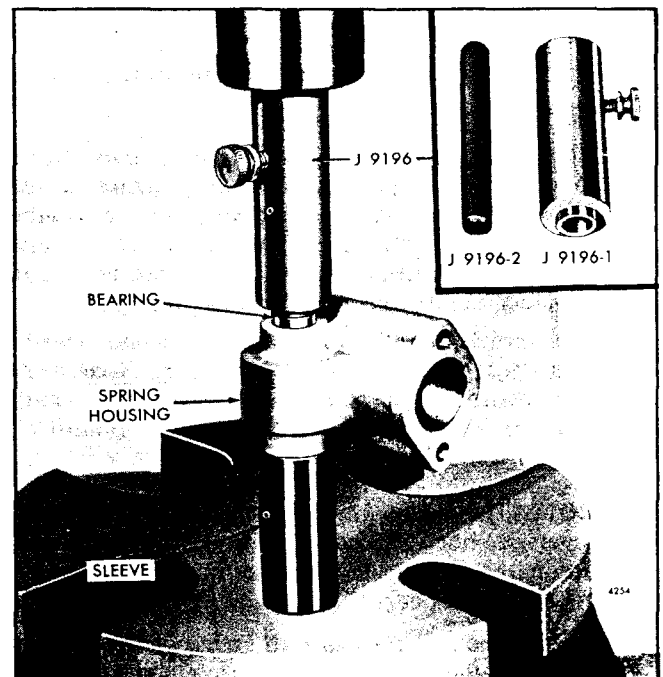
Installing Speed Control Shaft Bearings In Spring Housing
